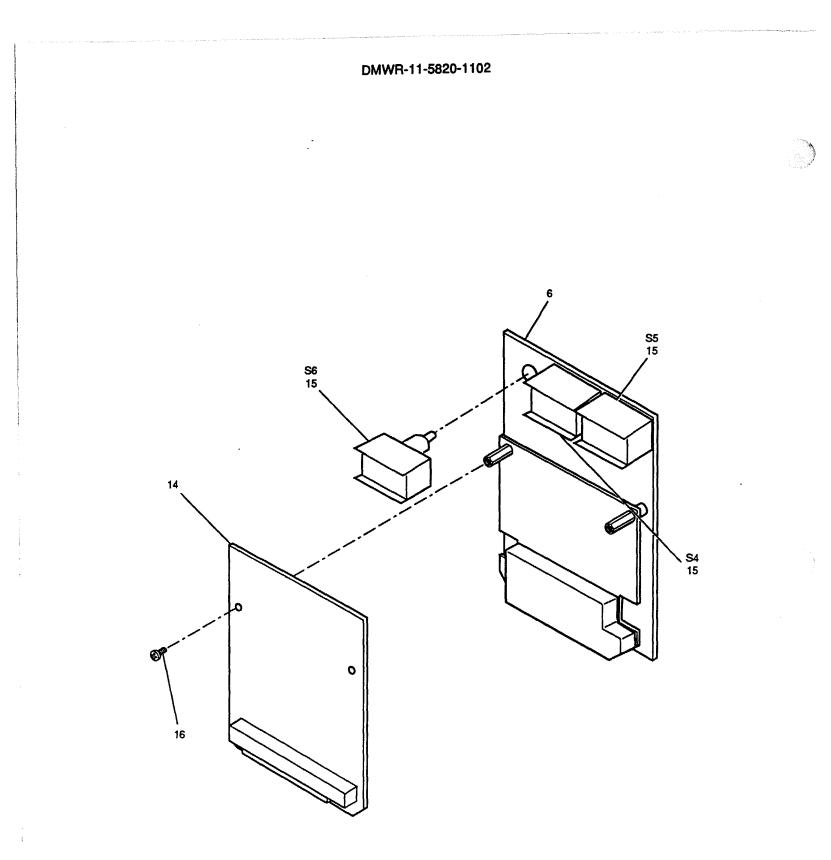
Control Panel Assembly (Sheet 2 of 2)
